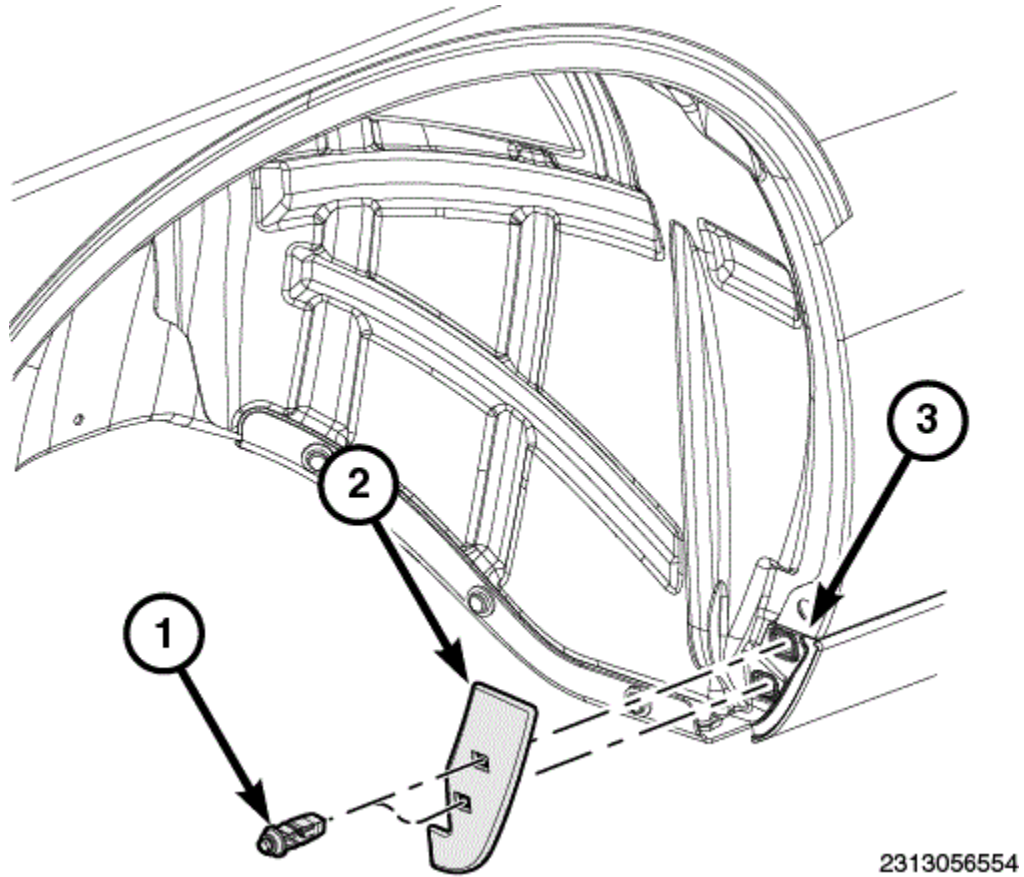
Specialty Nut, Front Spat & Sill Cladding
